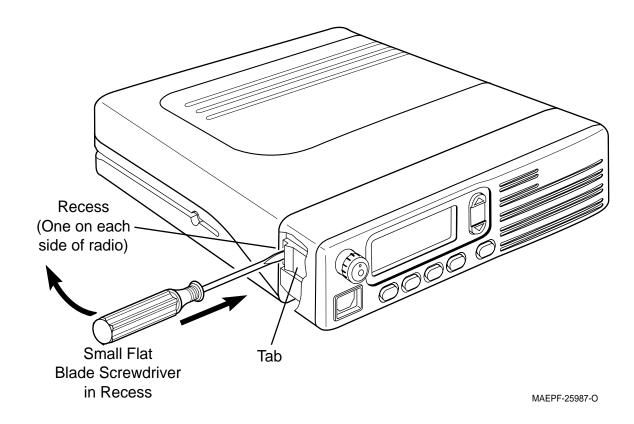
Inserting Screwdriver Blade into Recess Between Radio Body And Control Head Housing
